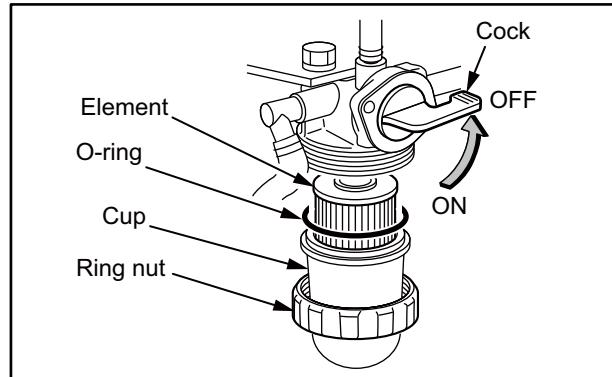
Fuel filter element (switching cock type) - Replace
